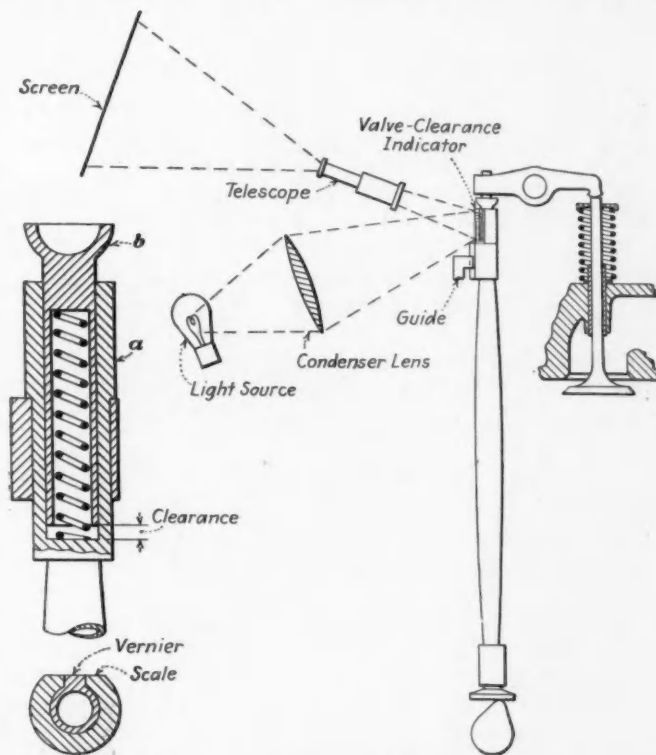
ENLARGED SECTION OF INDICATOR AND DIAGRAM SHOWING METHOD OF ITS USE
